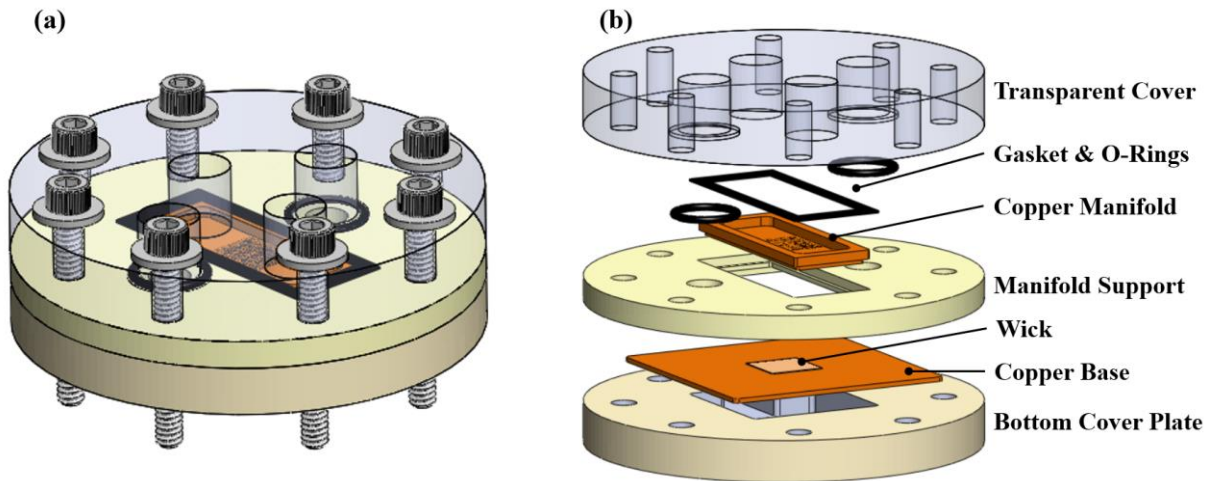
(a) An assembled view of the CAD model of the test section, including the screws used to keep the part together. (b) Exploded view of the test section (excluding the screws) with the main components indicated.
